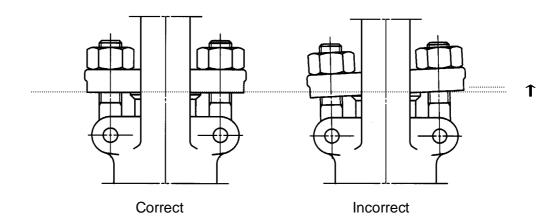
Examples for Adjustment (Tightening) of Gland Bolt Nuts
